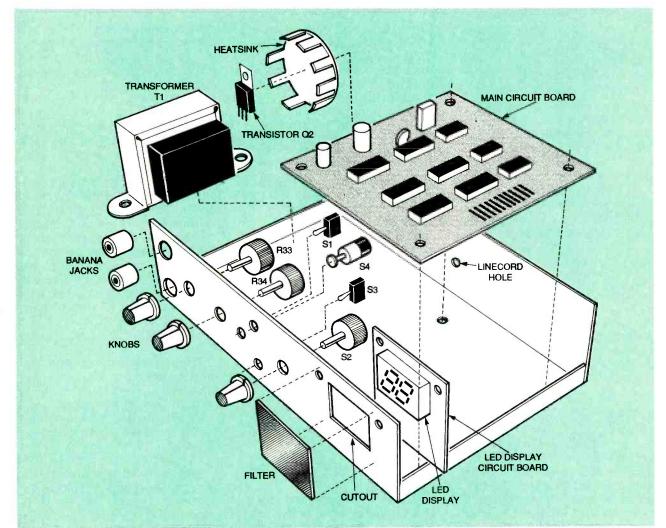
POWER SUPPLY ASSEMBLY DIAGRAM. The power supply components are all mounted in the lower half of a two-piece metal project case. The main circuit board is mounted on standoffs, and the transformer is fastened directly to the lower half of the case.
